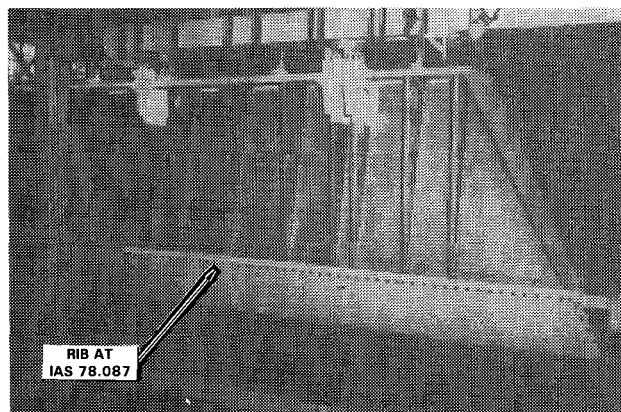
L-1011 composite inboard aileron with the lower cover removed.
